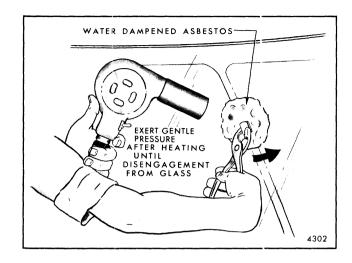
Removal of Bonded Rear View Mirror Support From Glass
